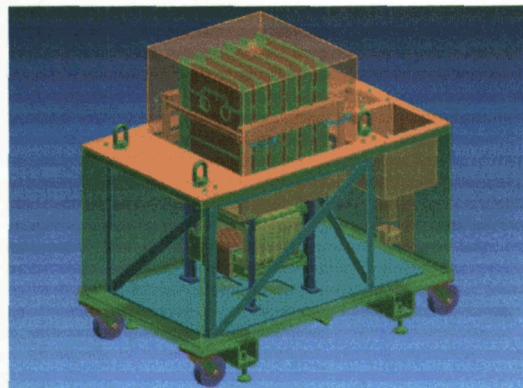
3D CAD drawing of 120 kV IGBT modulator
